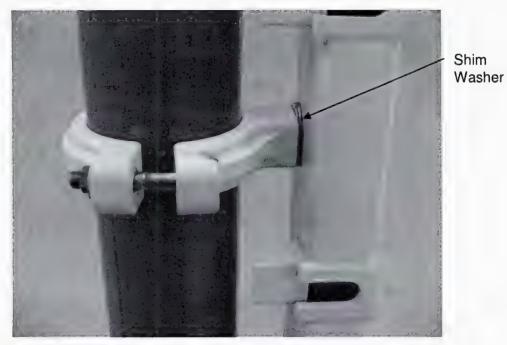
Beam Adjustment, Step 1 - Shim Rear Beam
